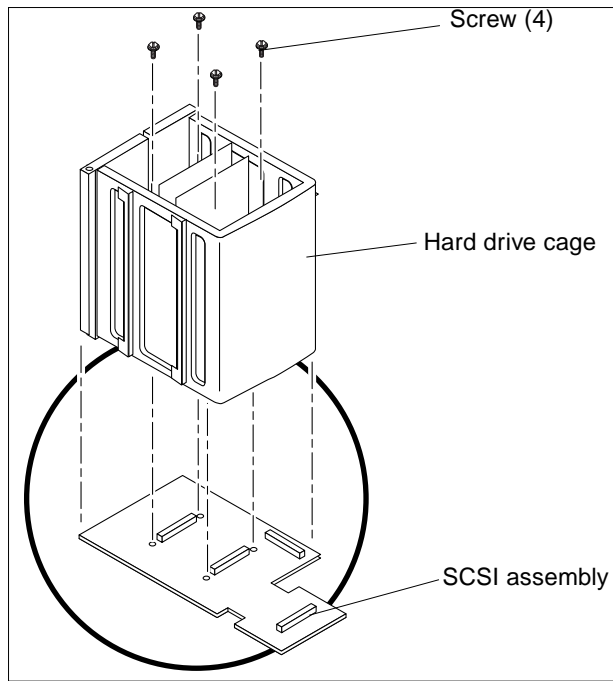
Removing and Replacing the SCSI Assembly (Sheet 2 of 2)
